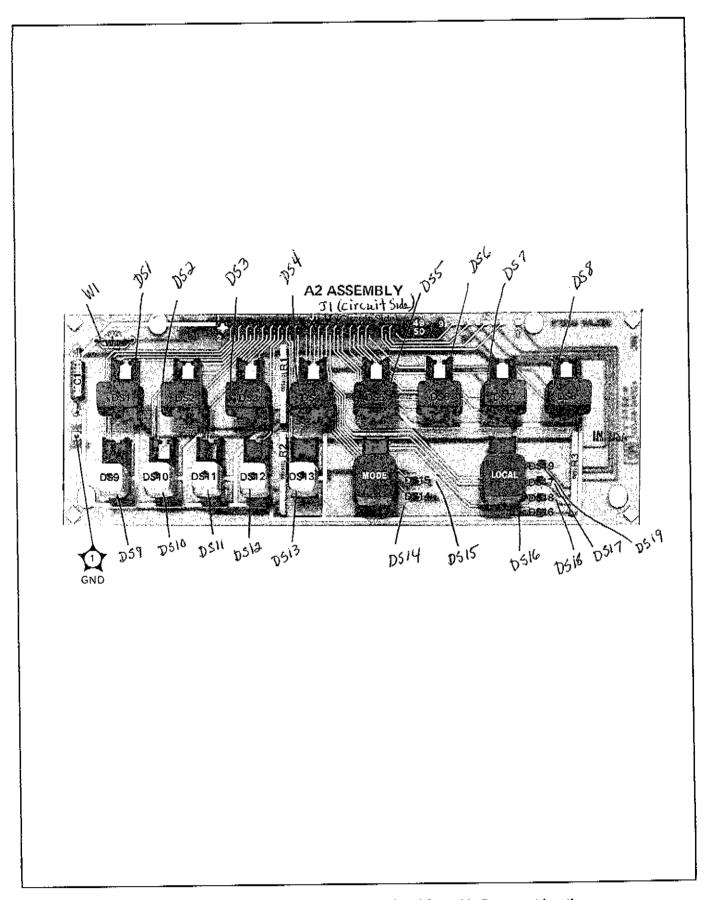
Front Panel Key and Display Board Assembly Component Locations
